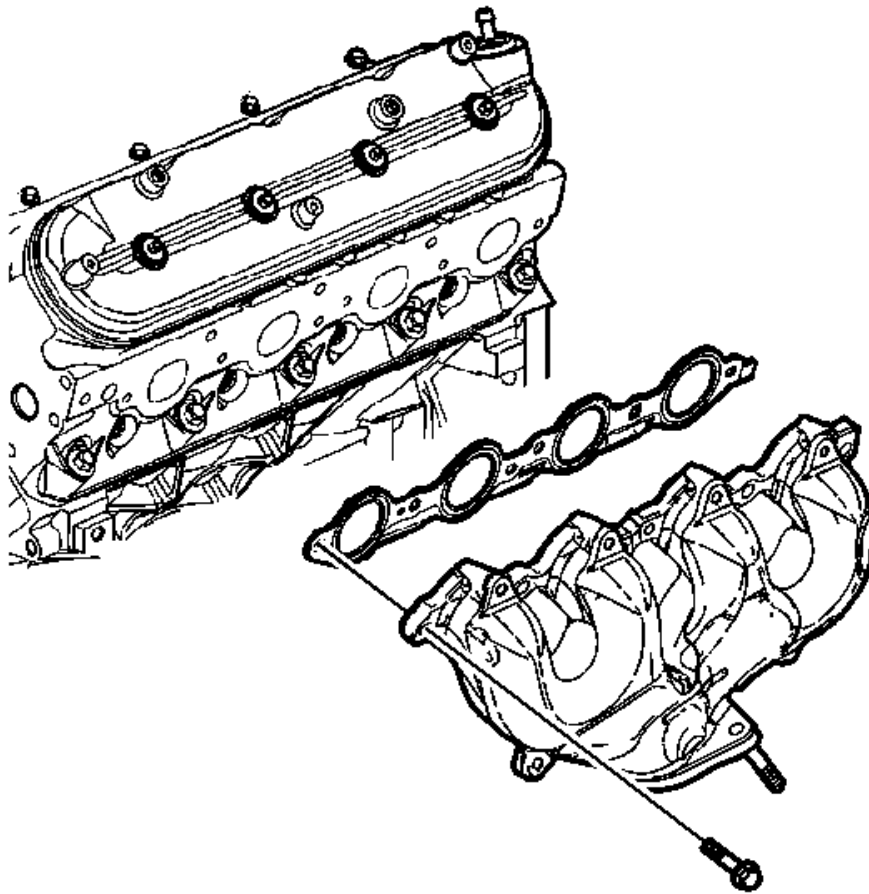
Left Exhaust Manifold, Gasket & Bolt
